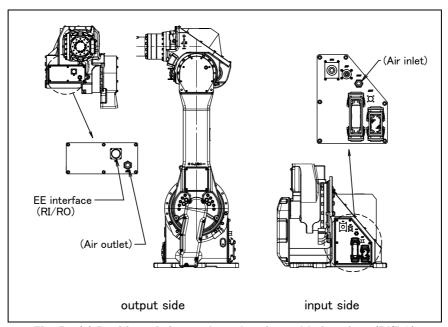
(a) Position of air supply and option cable interface (RI/RO) (When mechanical unit cable A05B-1125-H251 is specified)
